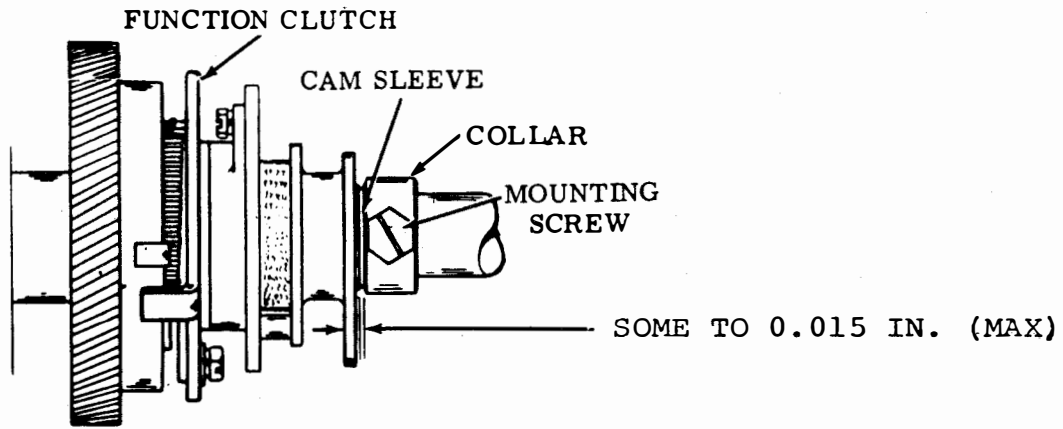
Function Clutch Drum End Play for Two-Shaft Units, Right Side View
